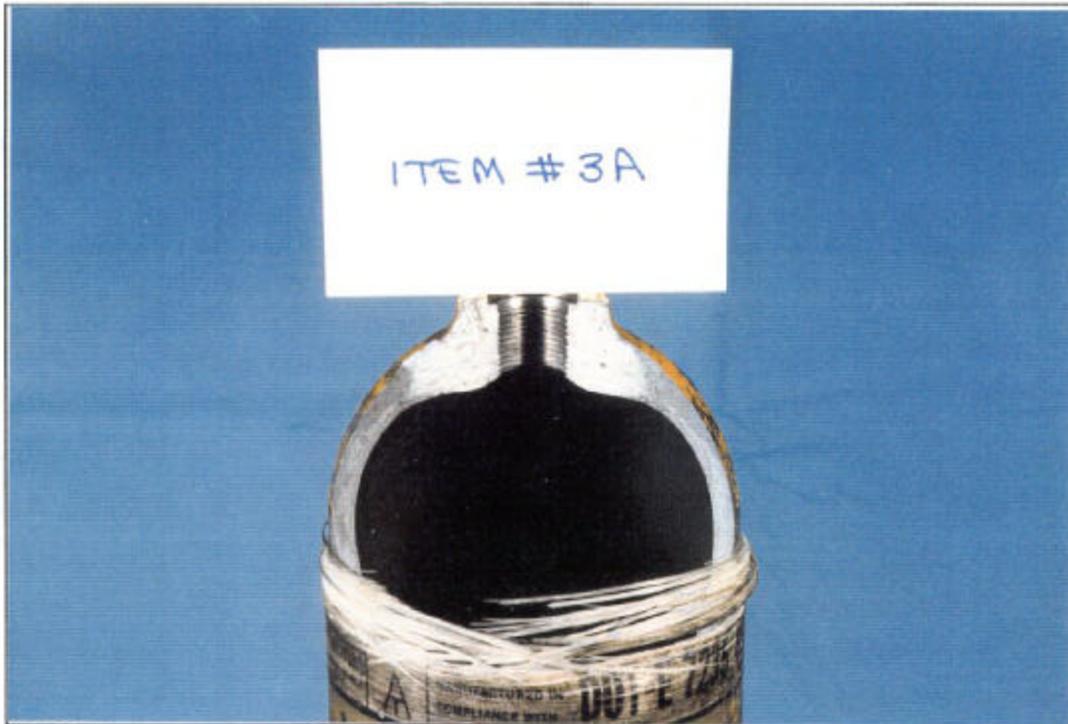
FRACTURE APPEARANCE OF THE HEAD OF THE RUPTURED CYLINDER -- ITEM 3A
